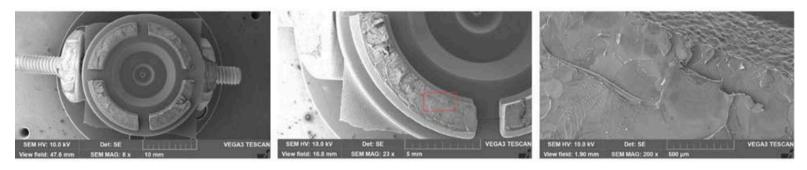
Microscopic images of the cellphone holder fracture surfaces.
